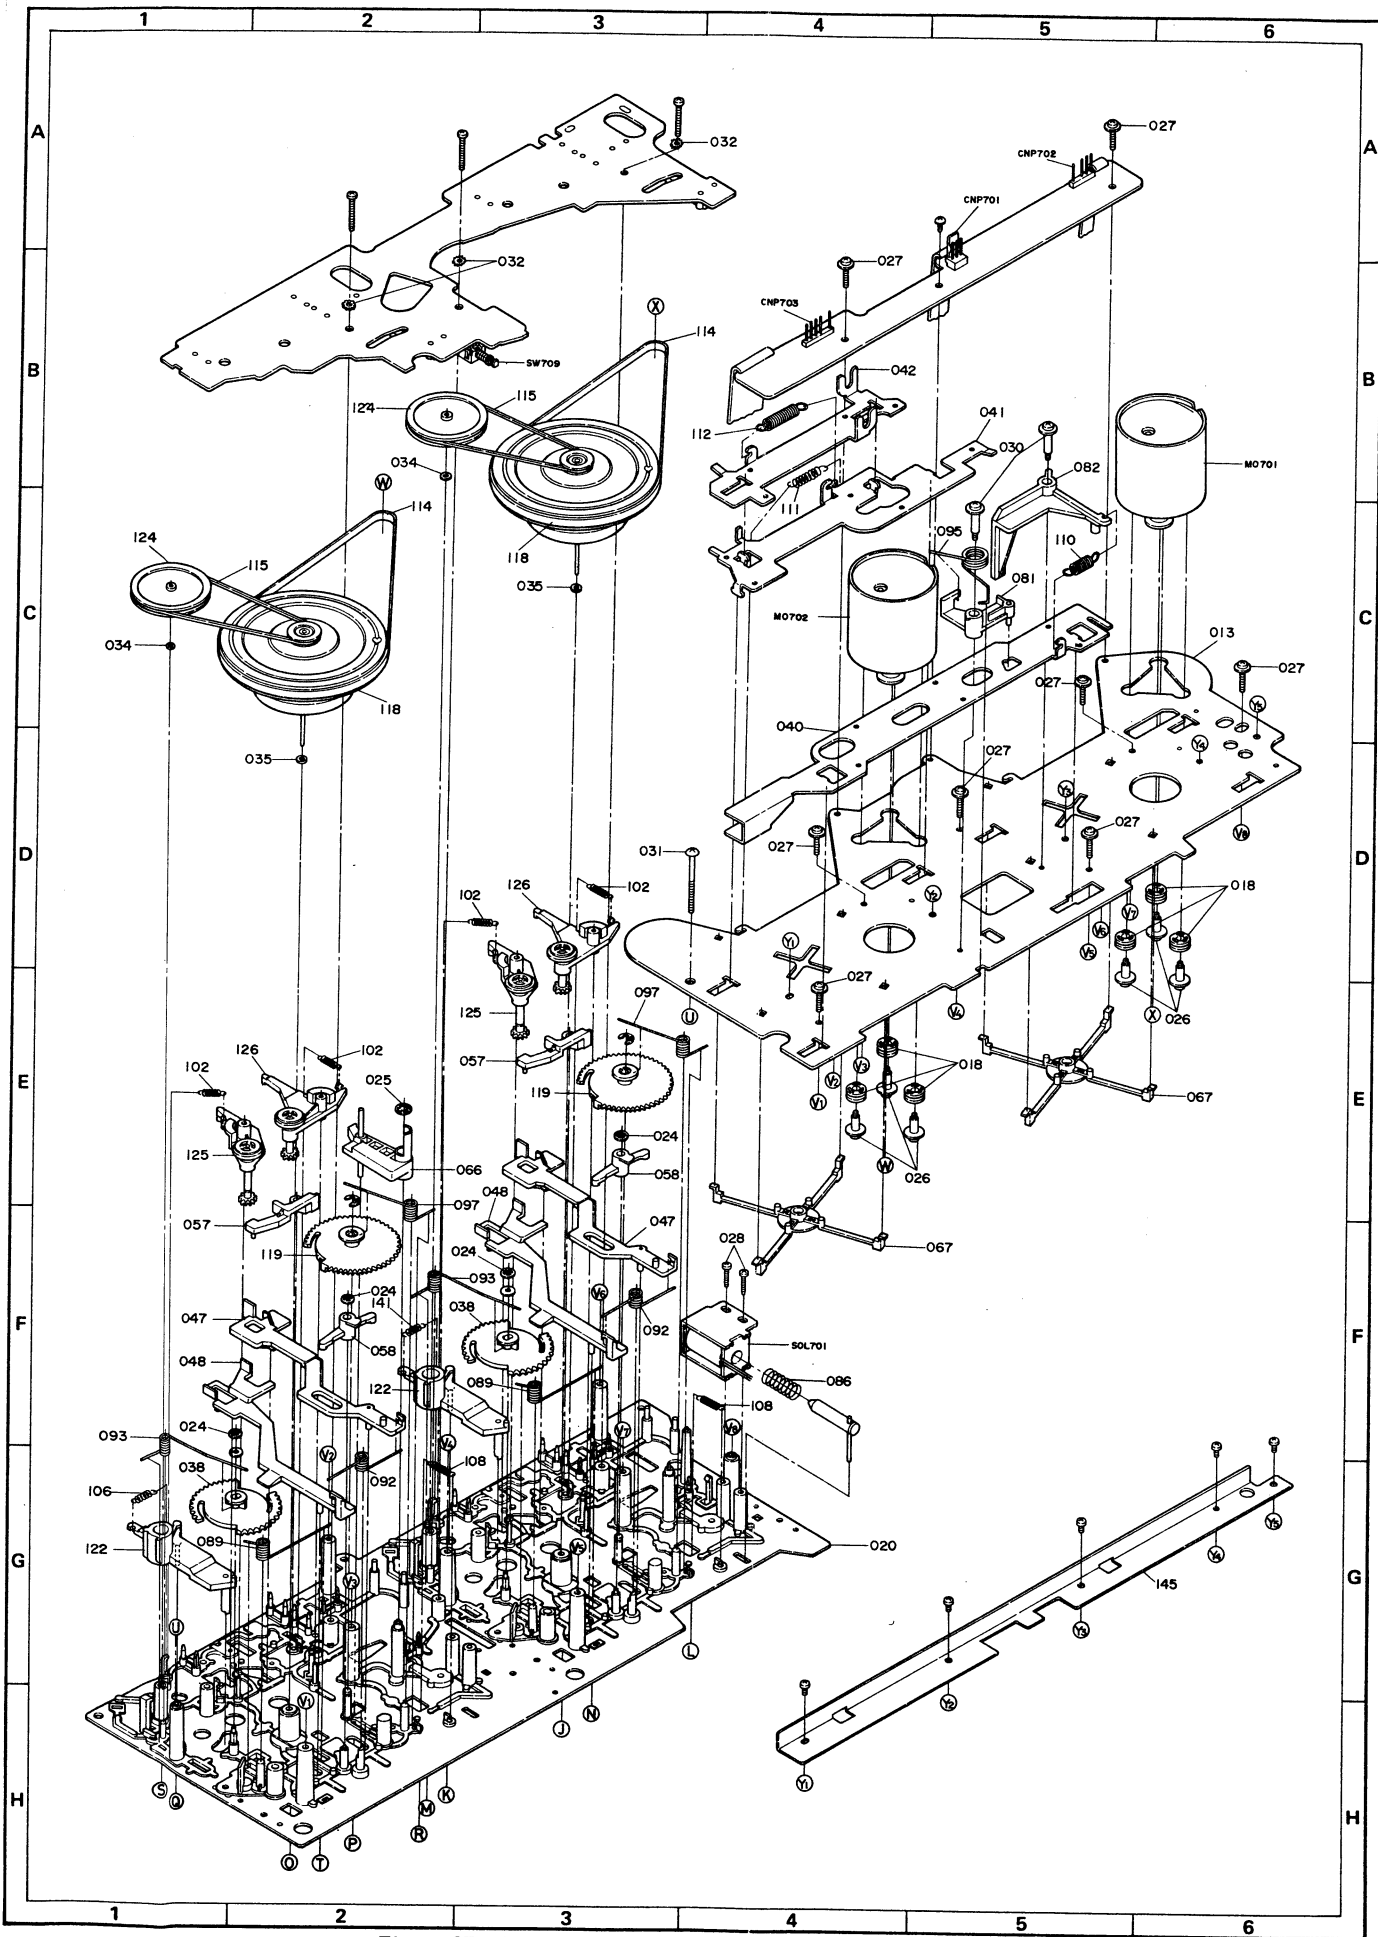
MECHANISM EXPLODED BOTTOM VIEW
